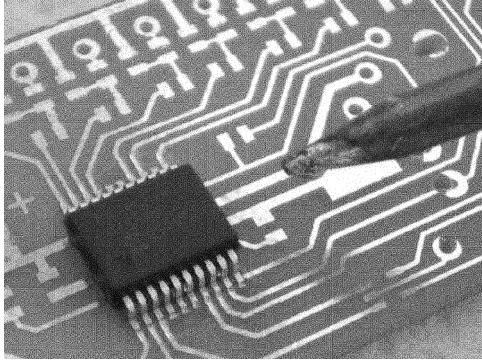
Dab a small amount of solder to the tip of the soldering iron to make the first provisional joint.
